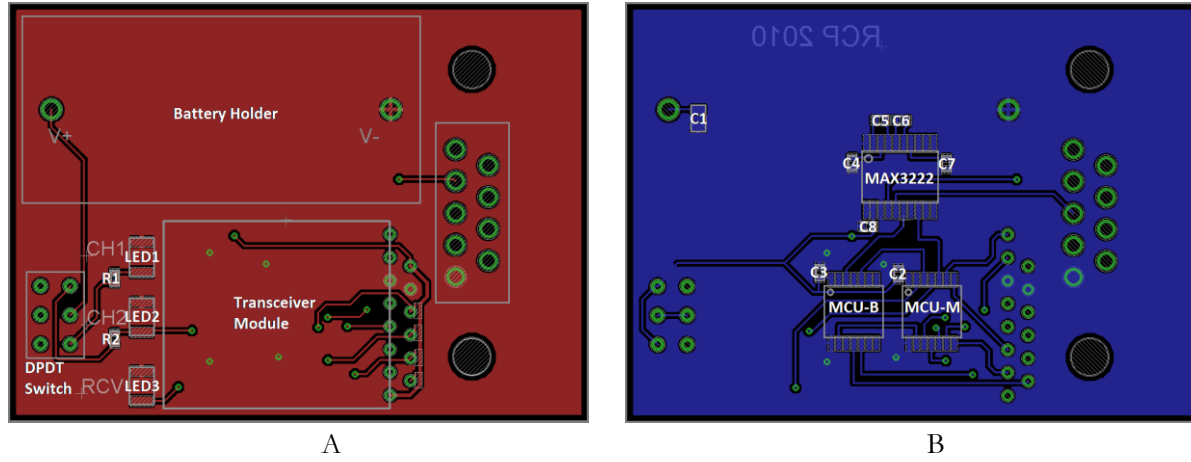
PCB design for the RCVR system showing the placement of tracks, pads, vias and components on the top (A) and bottom (B) layers.
